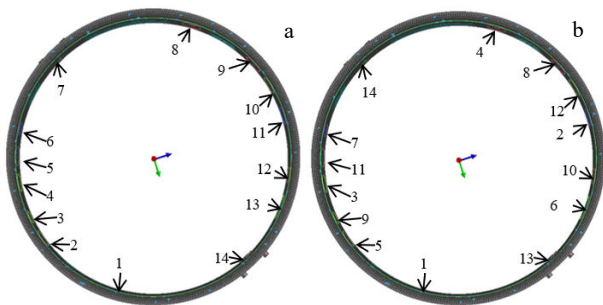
Schematic diagrams of sequential welding (a) and symmetrical welding (b)
